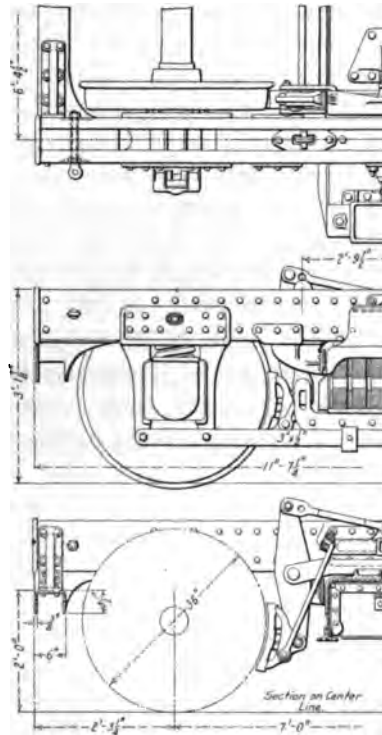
ONE END OF ORIGINAL FOUR-WHEEL STEEL PASSENGER CAR TRUCK BEFORE THE APPLICATION OF CLASP BRAKES; PENNSYLVANIA RAILROAD
